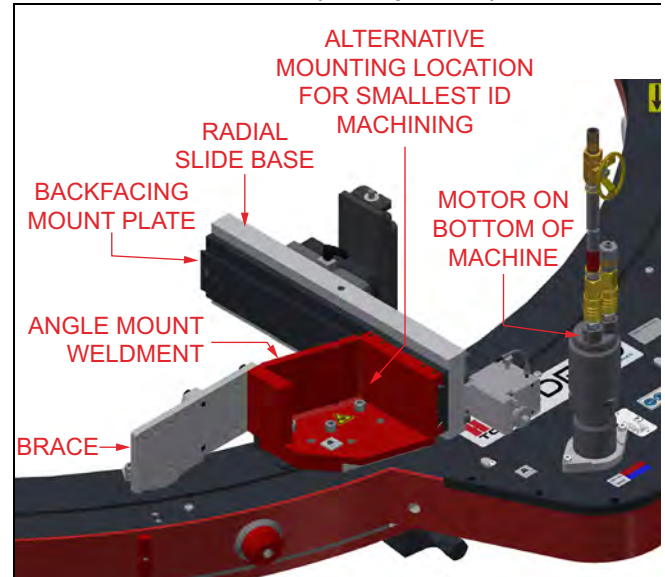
RELOCATED MOTOR AND BRACE LOCATION (ODF80 SHOWN)
